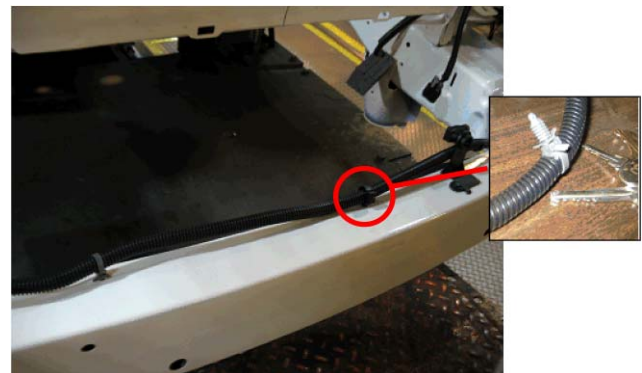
“Christmas-tree” type peg-in-hole assembly in automotive general assembly
